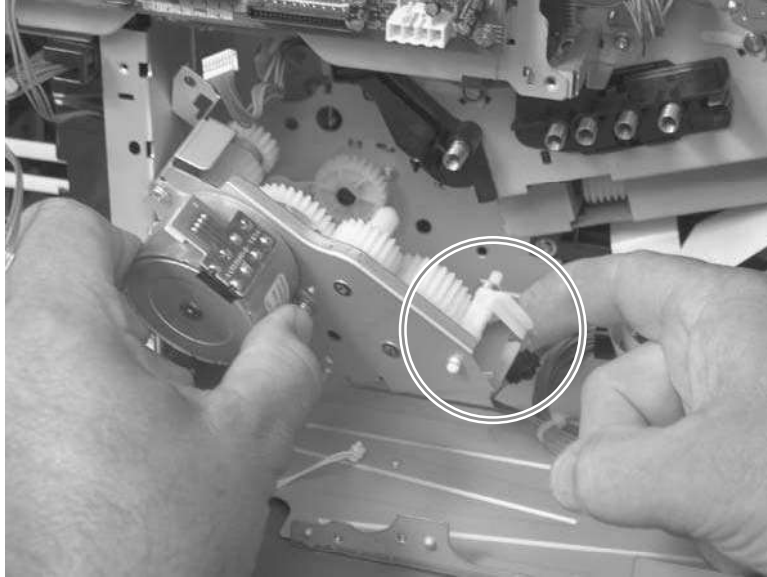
Remove the cassette pickup drive assembly (9 of 10)
